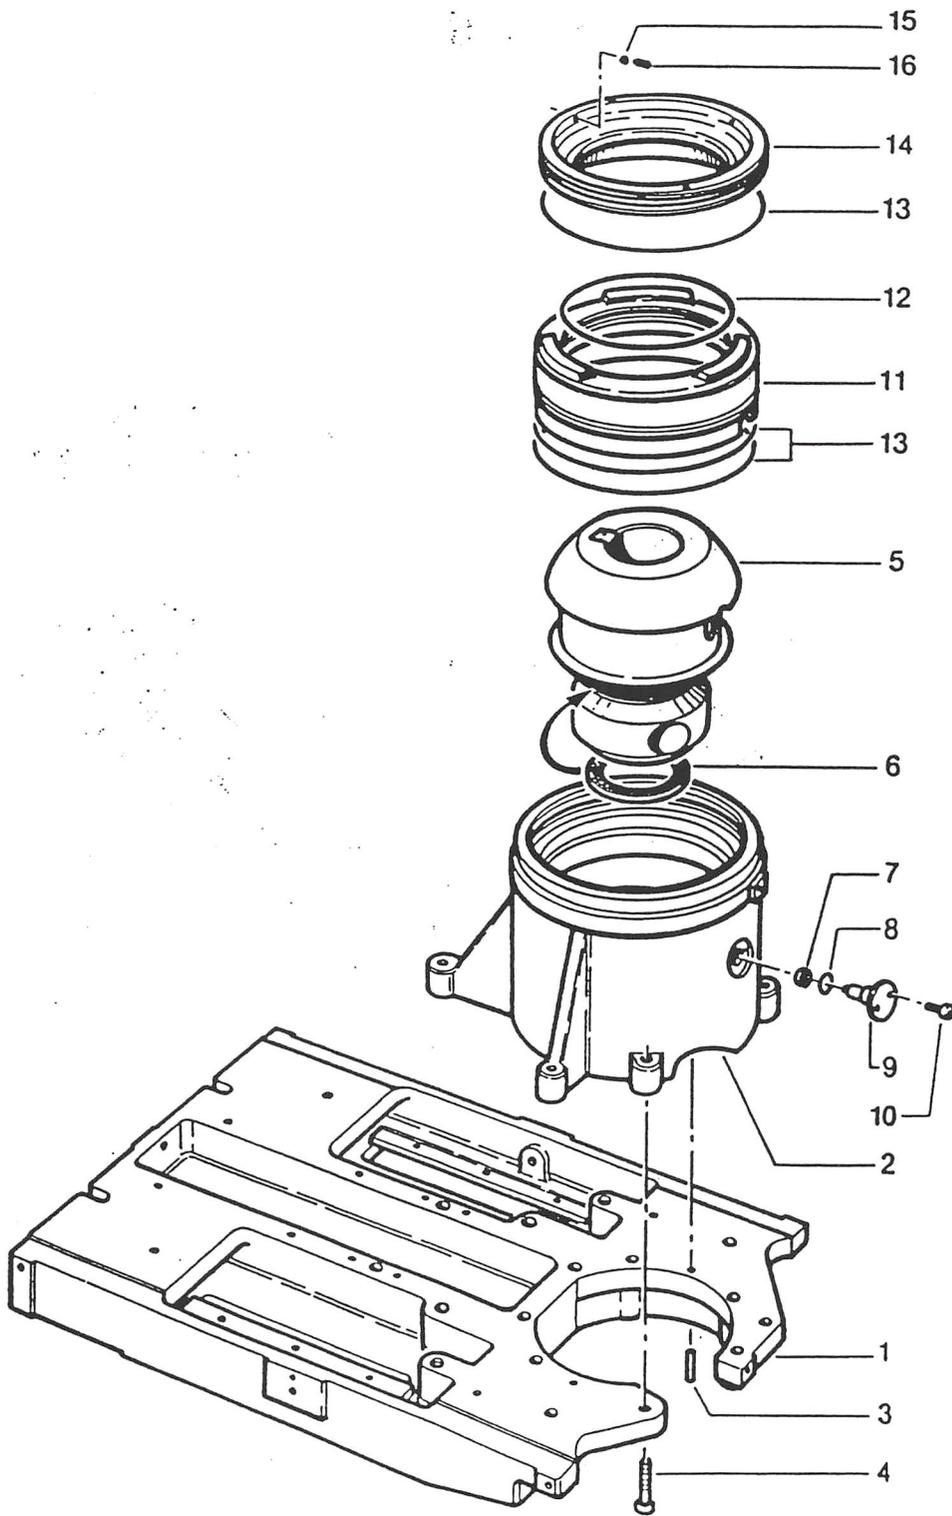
WORKHEAD GUIDES AND CLAMPING SYSTEM
